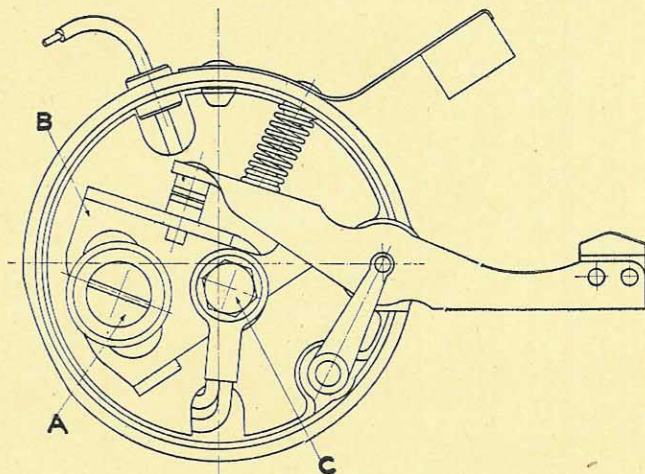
NEW TYPE CONTACT-BREAKER ASSEMBLY.
